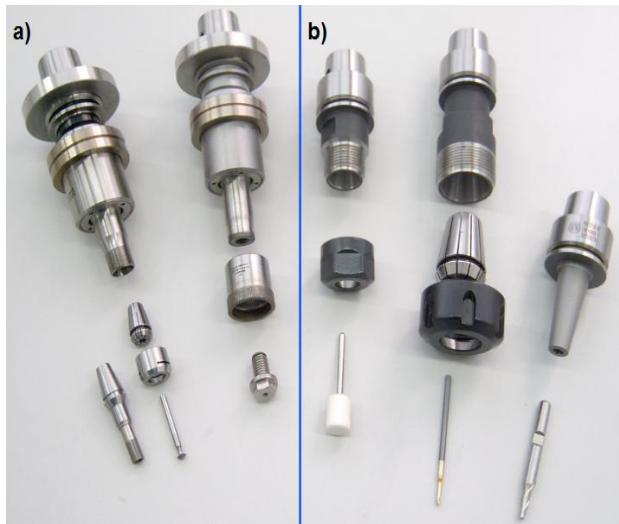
Tool holders with hollow taper HSK 32: a) for hybrid processes, b) for conventional processes
